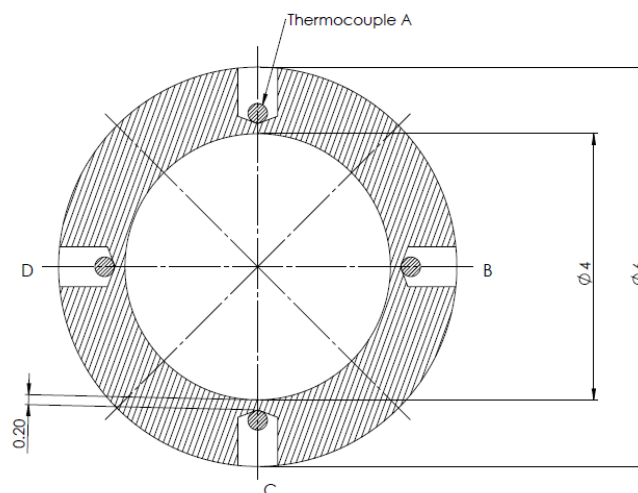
Cross-sectional view of the tube showing the thermocouple as mounted in the indentations, with the dimensions in mm. Each station only consisted of three thermocouples, with the left and right thermocouple being varied at each subsequent station.
